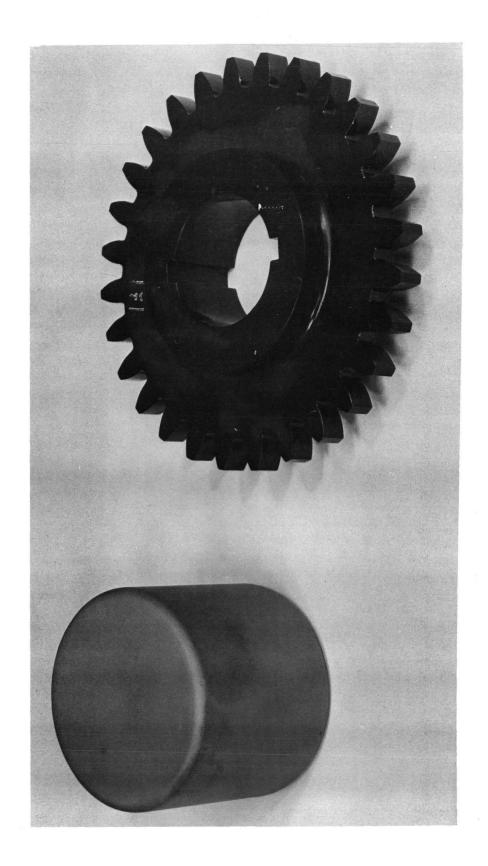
Starting Preform and Finish Machined Ausformed Gear
